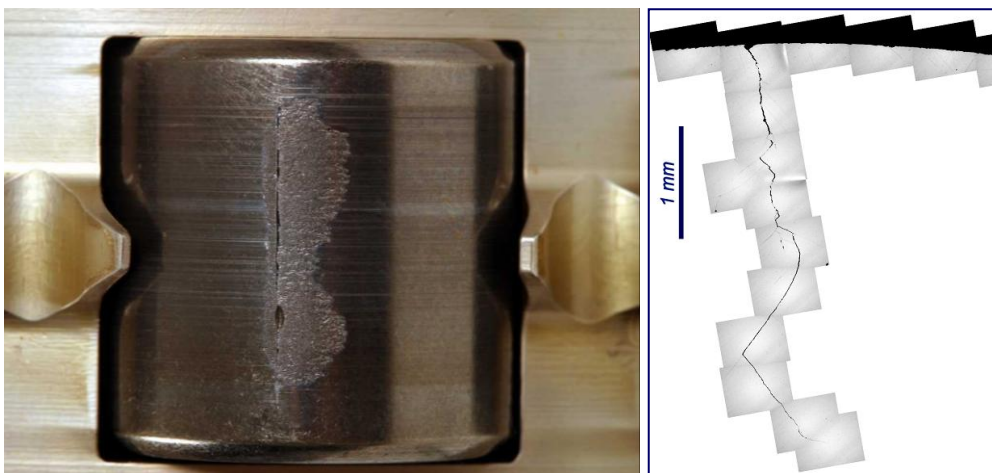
Case 3 - Photos showing crack in bearing rolling element
